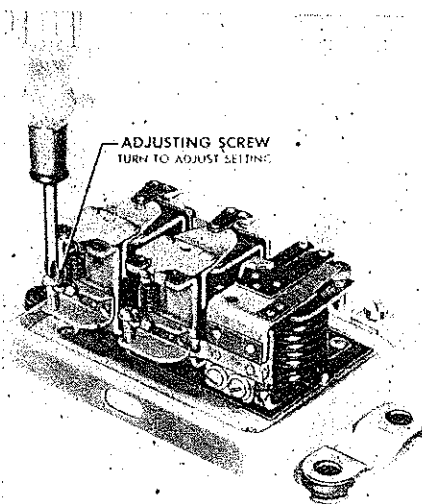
Adjusting voltage setting of voltage regulator on Delco-Remy single core regulators with screw adjustment
